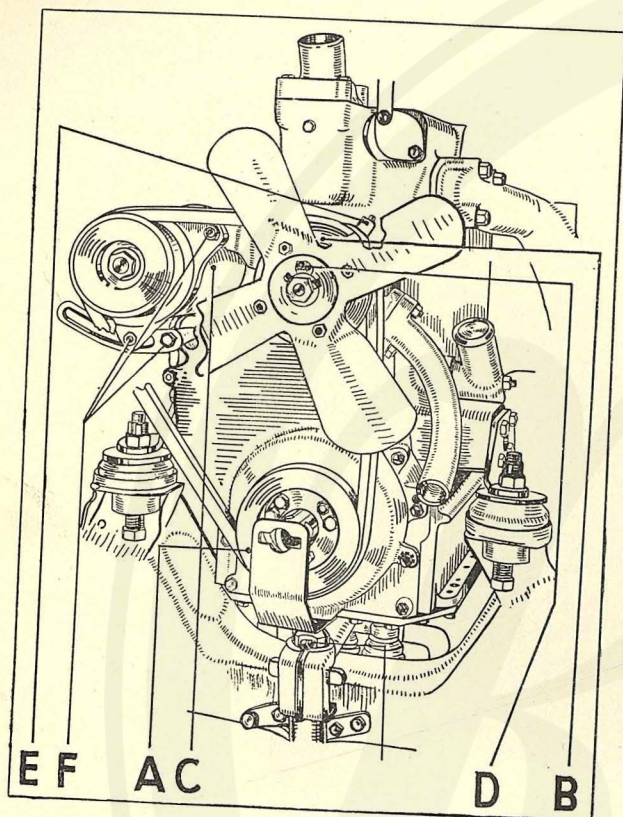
Front view of engine. A, crankshaft pulley; B, water pump; C, dynamo; D, fan bearing greaser; E, pump spindle bearing greaser; F, Bolts for adjusting tension of belt.
